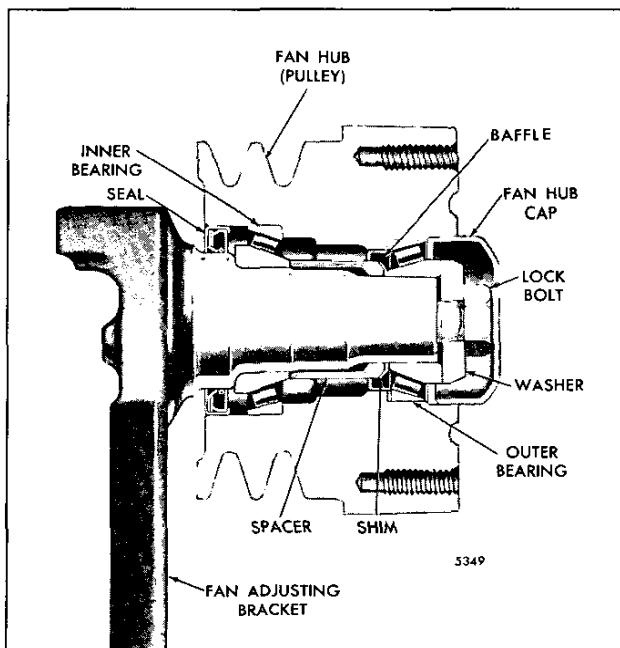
Shaft Type Fan Hub Assembly (6V Engine)
